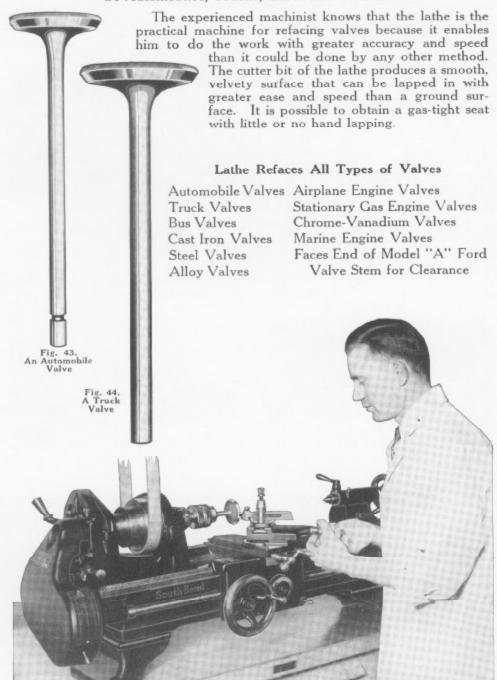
Refacing Automobile Valves on a 9-inch Junior South Bend Lathe
